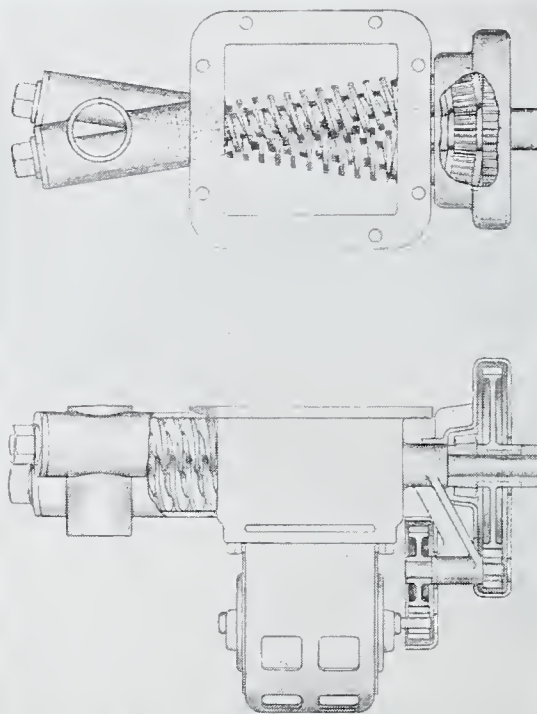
COVERT SCREW FEEDER, SHOWING VARIABLE SPEED MOTOR AND GEARING.
